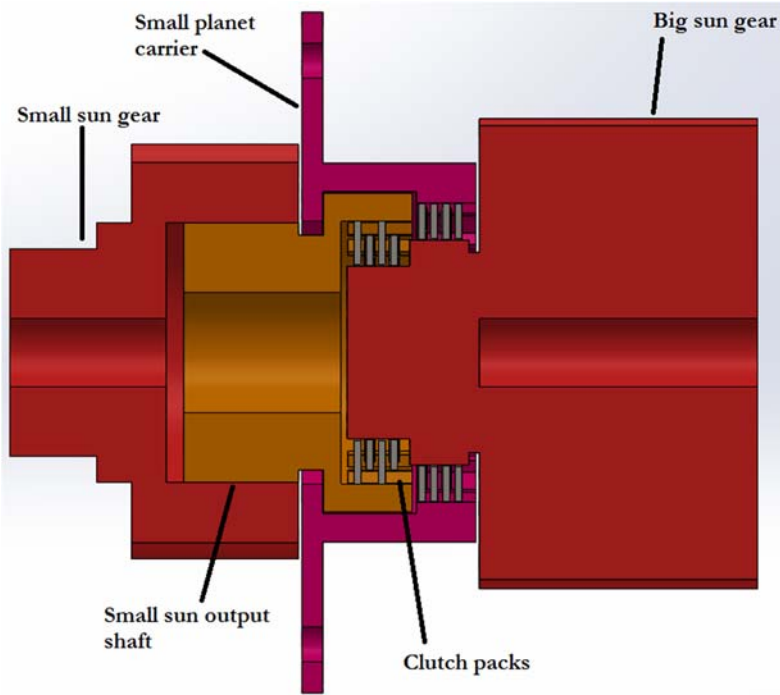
ASSEMBLY OF CLUTCH PACKS
